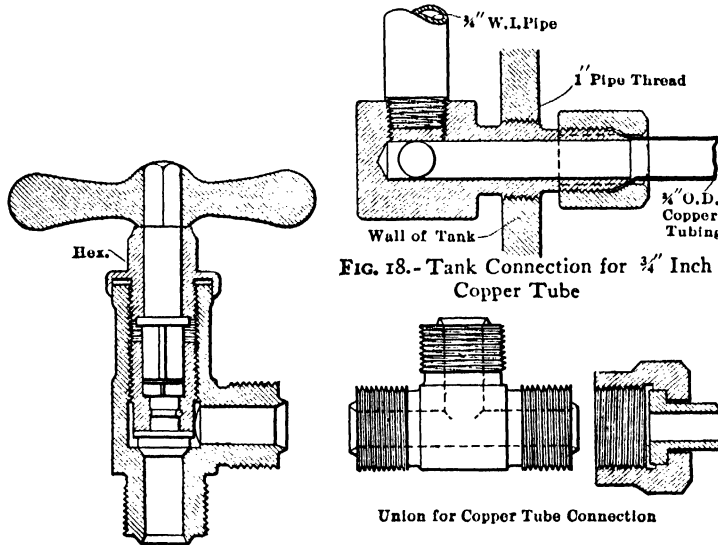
Tank Connection for 3/4" Inch Copper Tube
